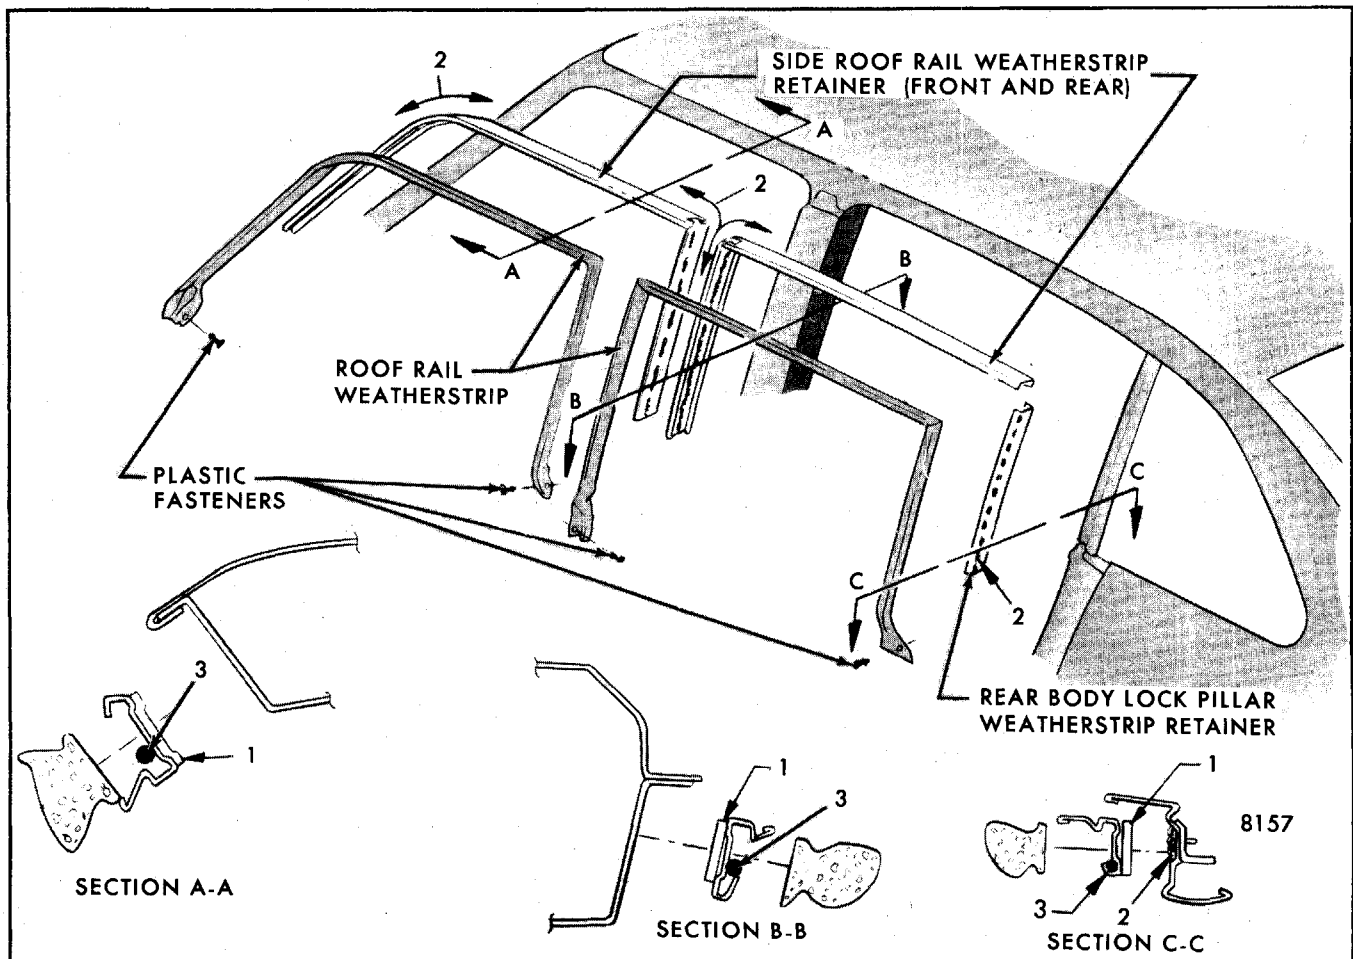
Side Roof Rail Weatherstrip and Weatherstrip Retainer - "A" Four-Door Styles Shown, Other Styles Similar
